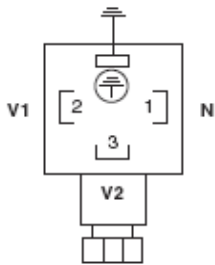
Three pin electrical plug connector (according to ISO 4400).
